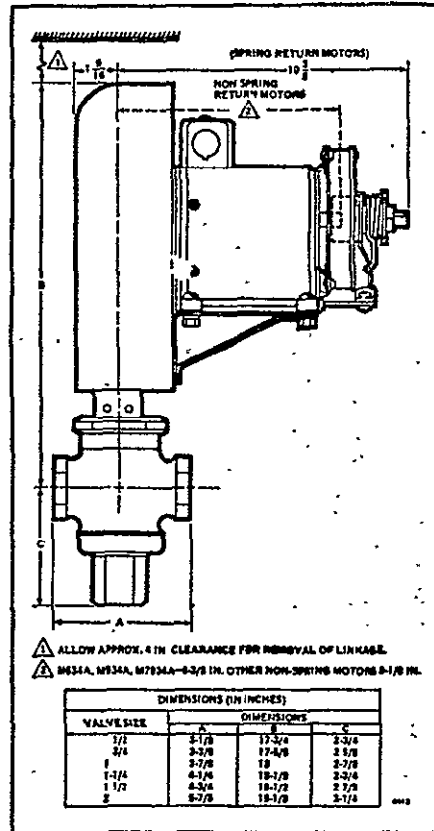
Mounting dimensions V5013A with Q601 Linkage.
